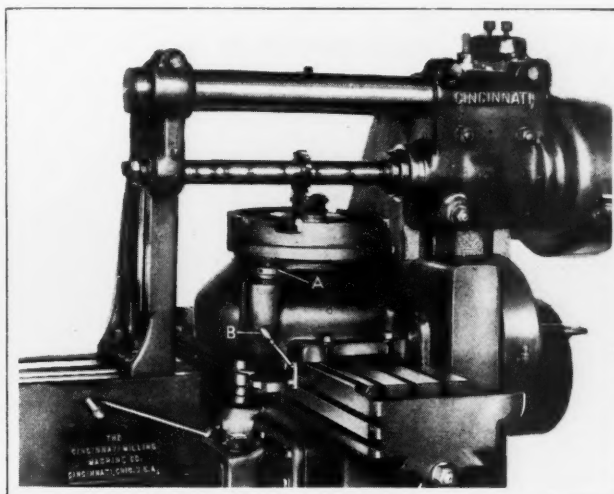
Plain Automatic Clutch Tooth Milling Equipment, with Automatic Indexing Fixture
